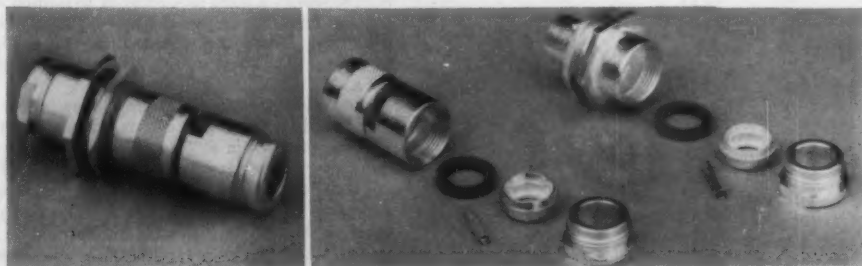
Drawing of the rotary joint made with coaxial connectors.
